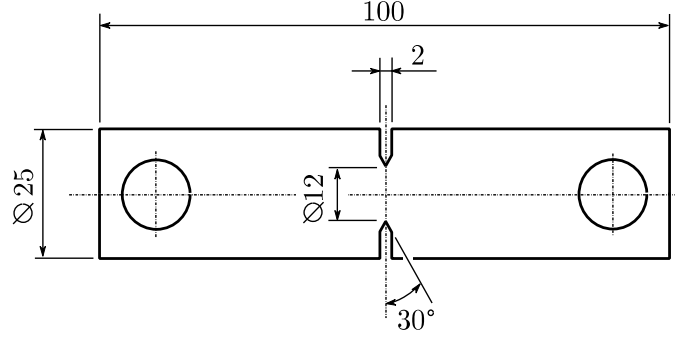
Schema of the cylindrical specimen (example dimensions)
